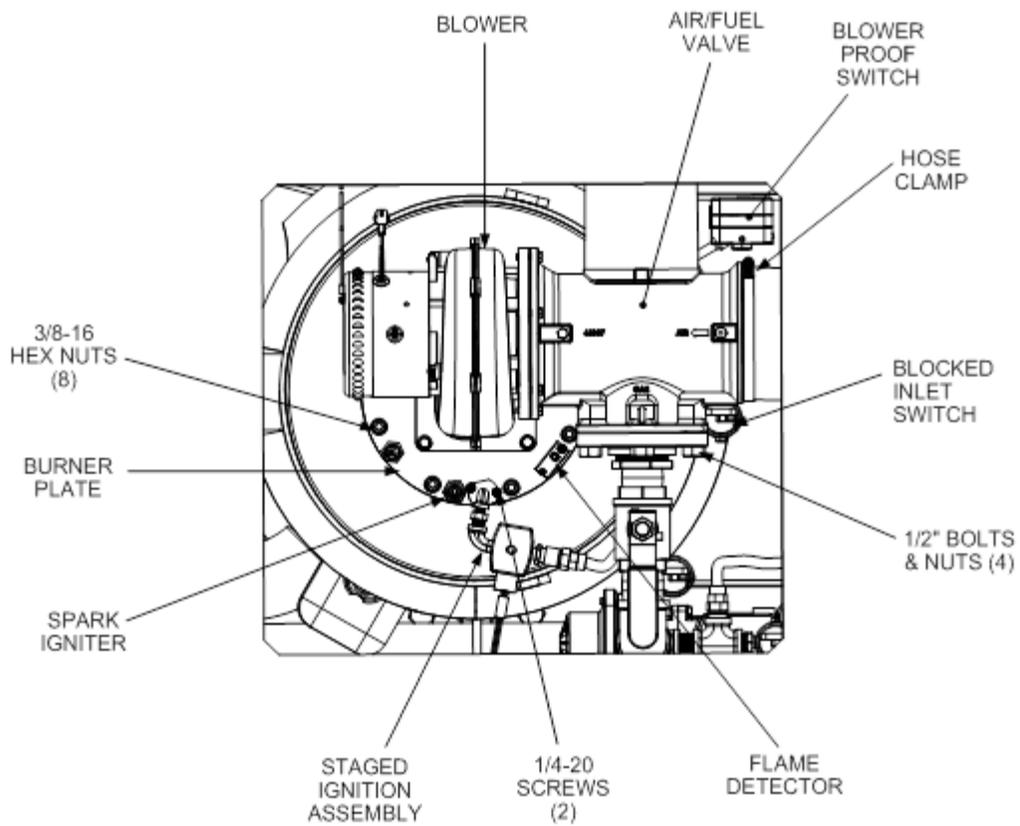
Benchmark 1.5LN Burner Assembly Removal
